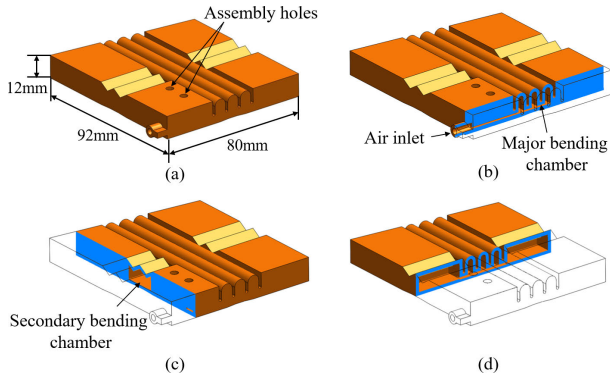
Bio-inspired palm design. (a) 3D model of the proposed palm design. (b) Cross-section view showing shape of the air chamber that leads to major bending. (c) Cross-section view showing shape of the air chamber that leads to secondary bending. (d) Cross-section view showing the connection between major bending chamber and secondary bending chamber.
